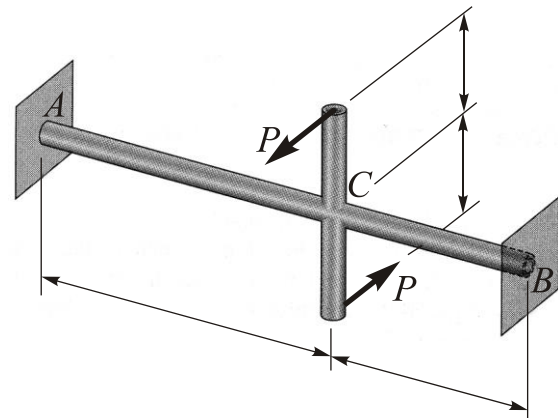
A hollow steel shaft is held against rotation at ends A and B
